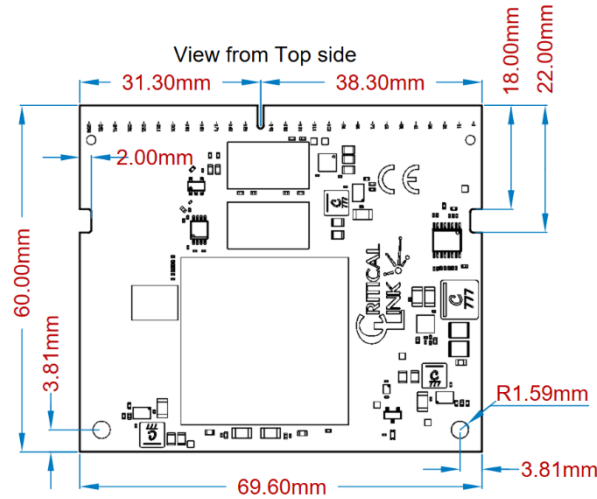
MitySOM-C10G Mechanical Outline, Top Side View
